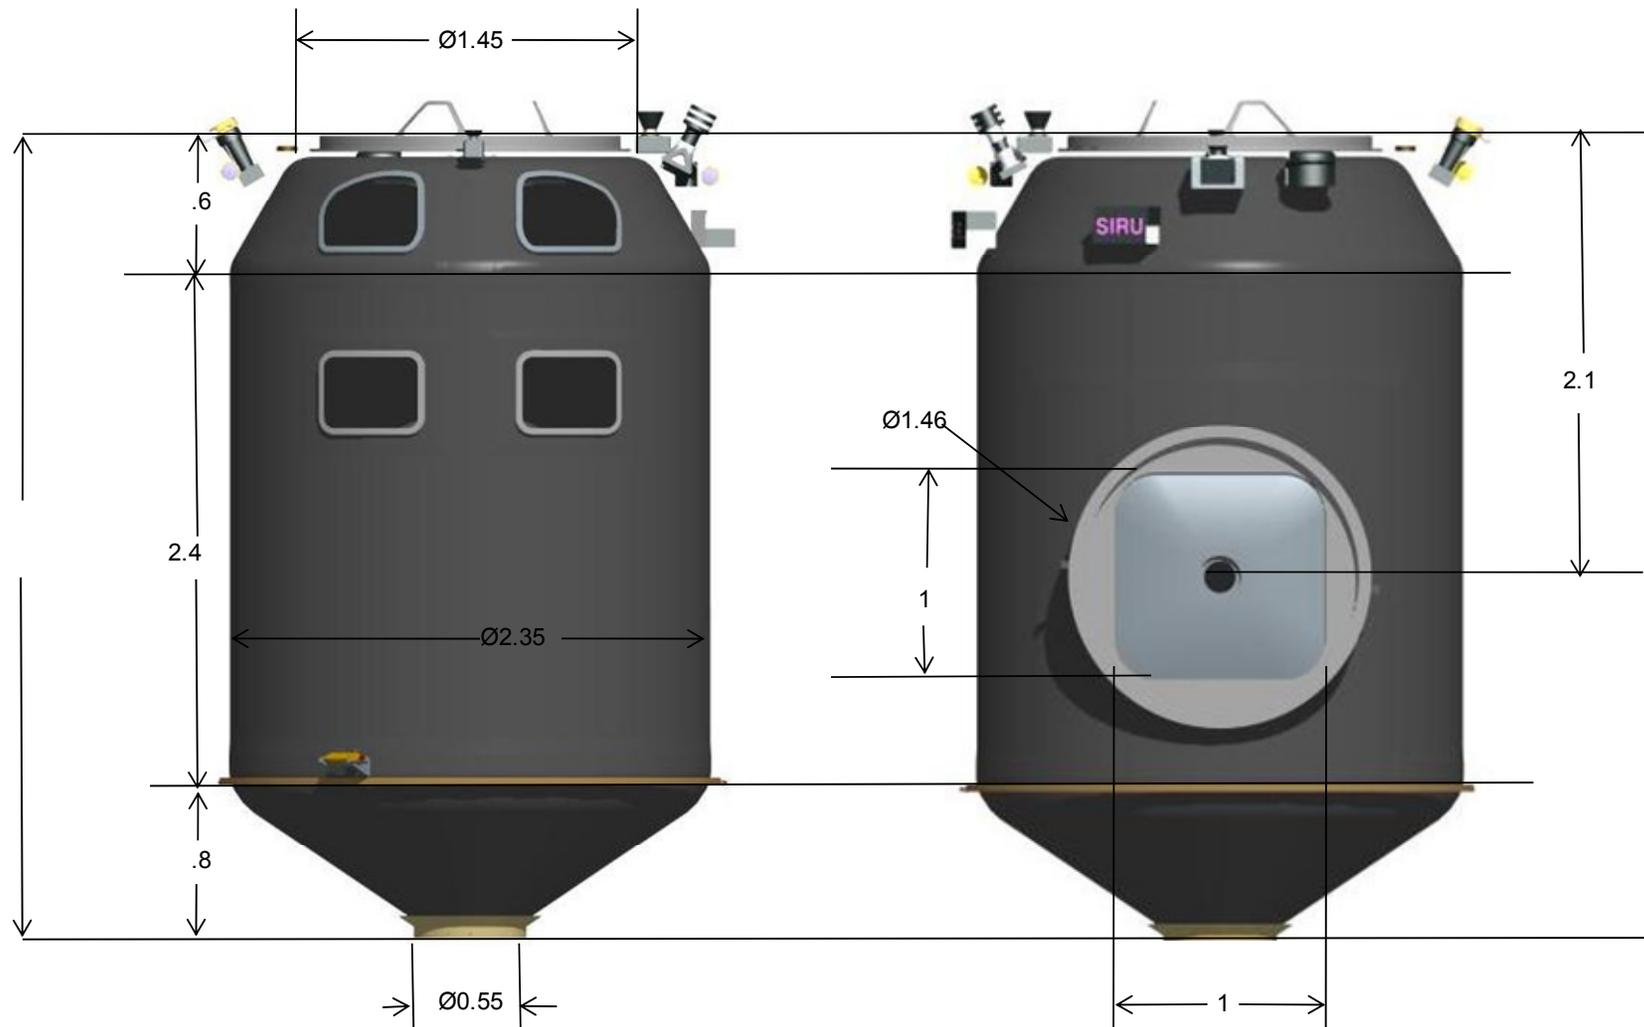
Overall dimensions of ascent module used in mock-up fabrication (dimensions in meters).
